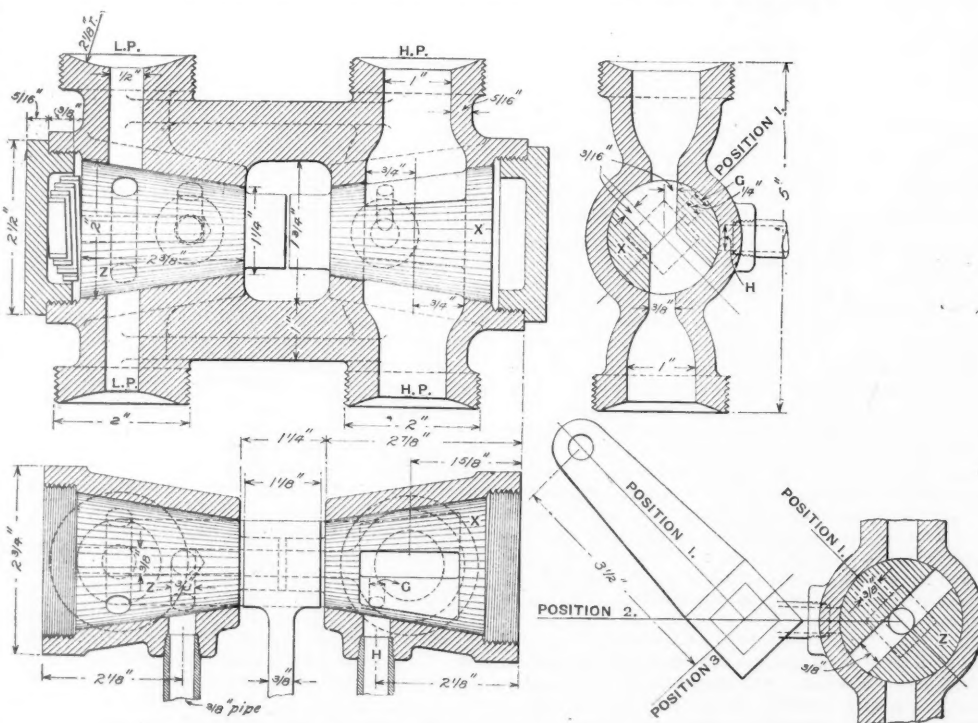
Combined Cylinder Cock and Starting Valve for Vaucain Compound Locomotive.
